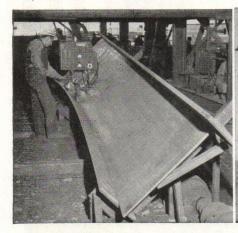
Shop fabricating truss sections, using "Automatic Lincolnweld." Fillet welds are made in single pass at 600 amps. and speed of 24 inches per minute.
